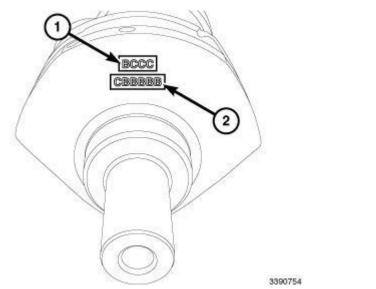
Bearing Identification & Letters Stamped Into Crankshaft Courtesy of CHRYSLER GROUP, LLC
